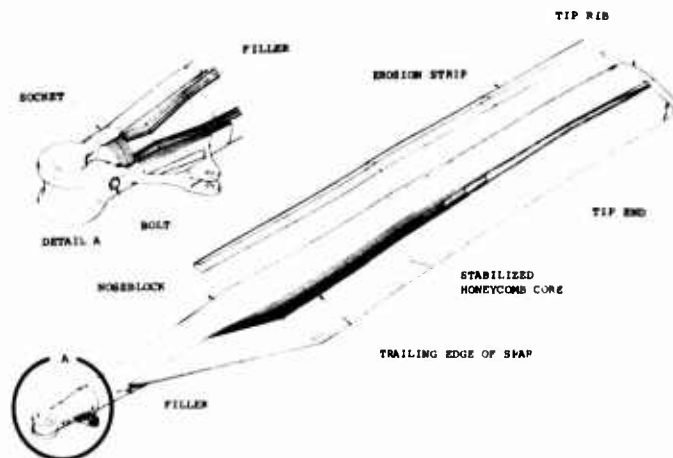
Assembly Buildup of the Advanced-Geometry Blade.
